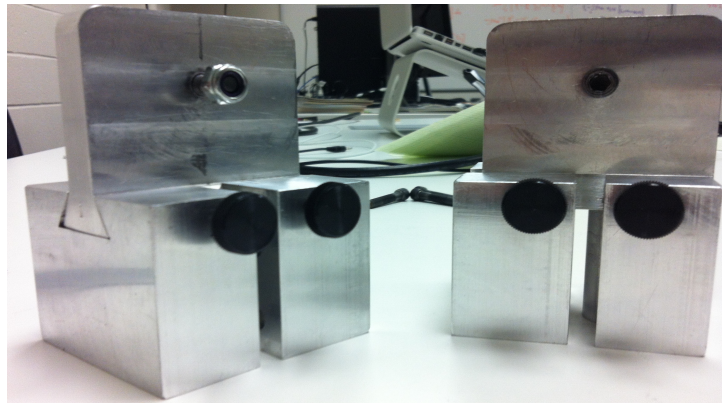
Manufactured Structural Components of Test Fixture Set-up
